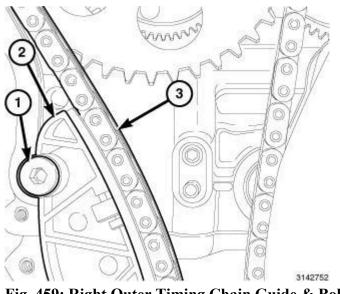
Right Outer Timing Chain Guide & Bolt Courtesy of CHRYSLER GROUP, LLC
